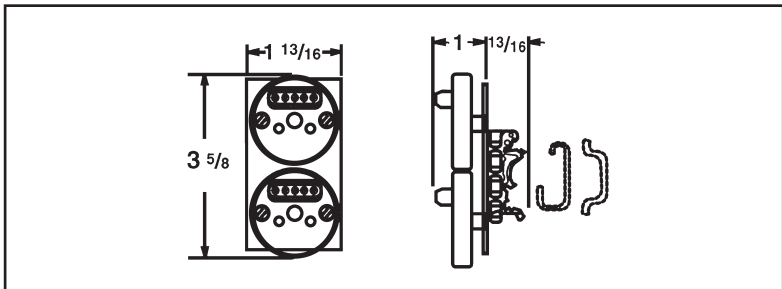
TX 90-DIN DIN Rail Mounting Adapter (in Inches)
